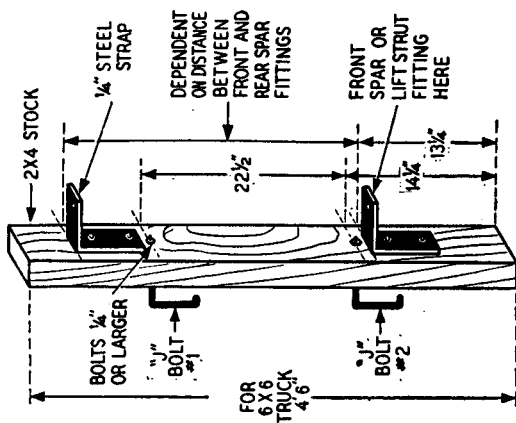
Wing jigs for loading wings on cargo truck or trailer.
